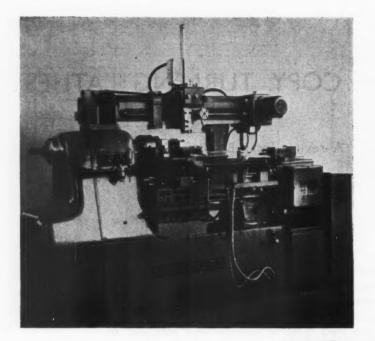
(left). "Magdeburg" Model D.H. 300 semi-automatic lathe equipped with two hydraulic copy turning units and also fitted with overhead toolslide for facing or recessing.
